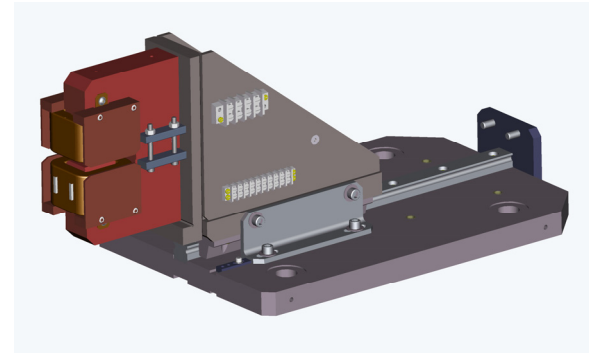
Image of 31010101-504100 left magnet and rail base assembly
